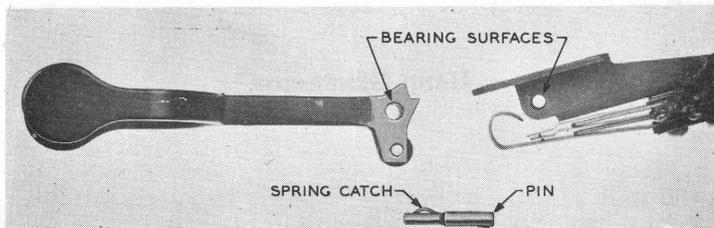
143Y SWITCHHOOK ASSEMBLY
